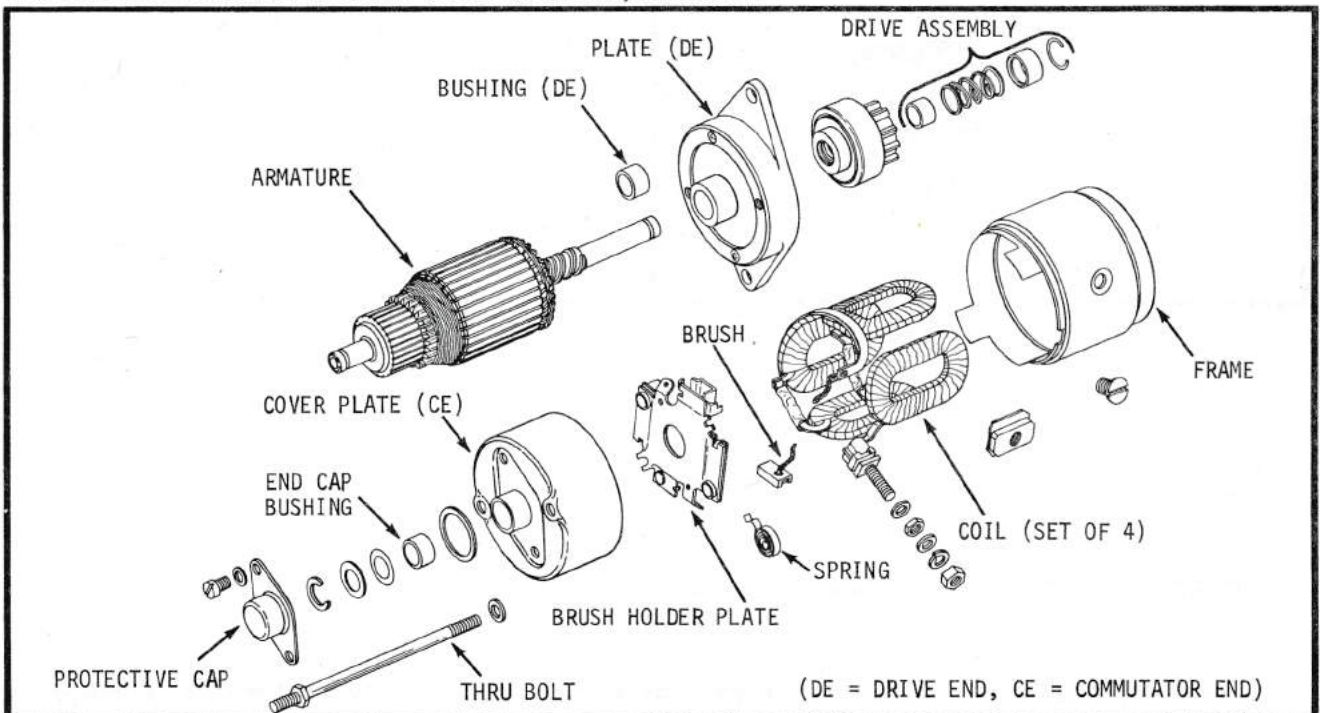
EXPLODED VIEW: ELECTRIC STARTING MOTOR
